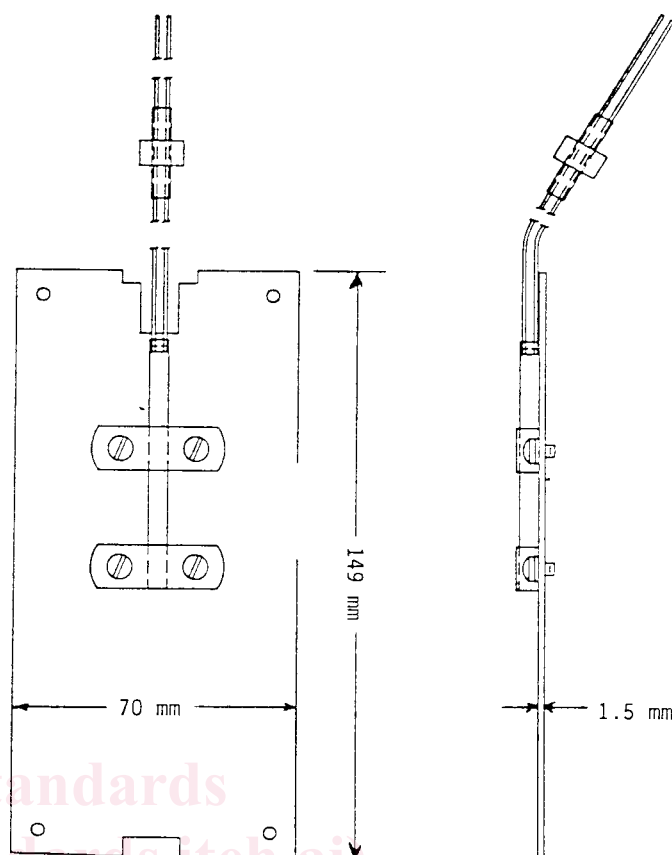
Black Panel Thermometer Unit Using RTD Thermocouple Sensor
